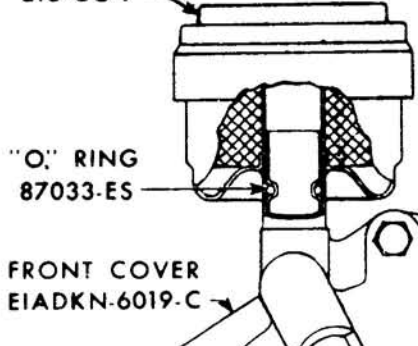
Early breather assembly was push fit on pipe in timing gear (front) cover and is sealed with "O" ring. It is recommended that the breather be secured with clamp and bracket; refer to Figs. 48 and 49.
